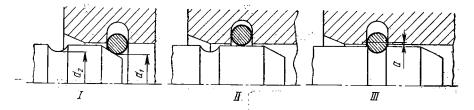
Locking by spring ring placed in external-part groove I, II, assembly sequence
